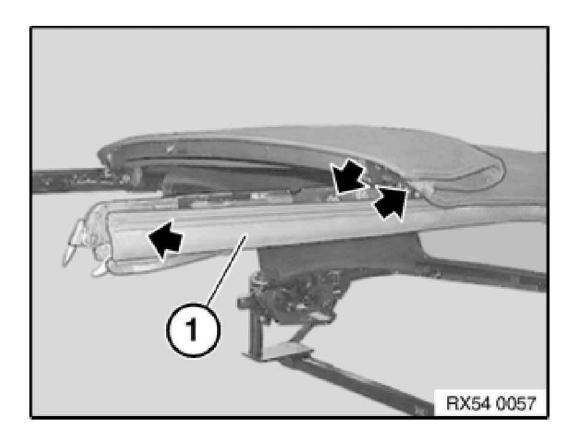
Removing Front Seal Courtesy of BMW OF NORTH AMERICA, INC.
